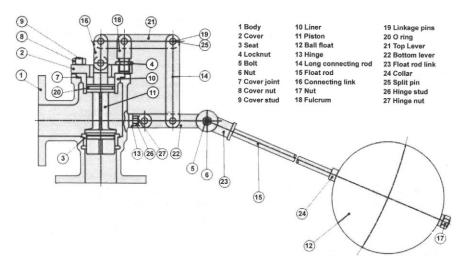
A balanced float valve Courtesy of Taylor Shaw
